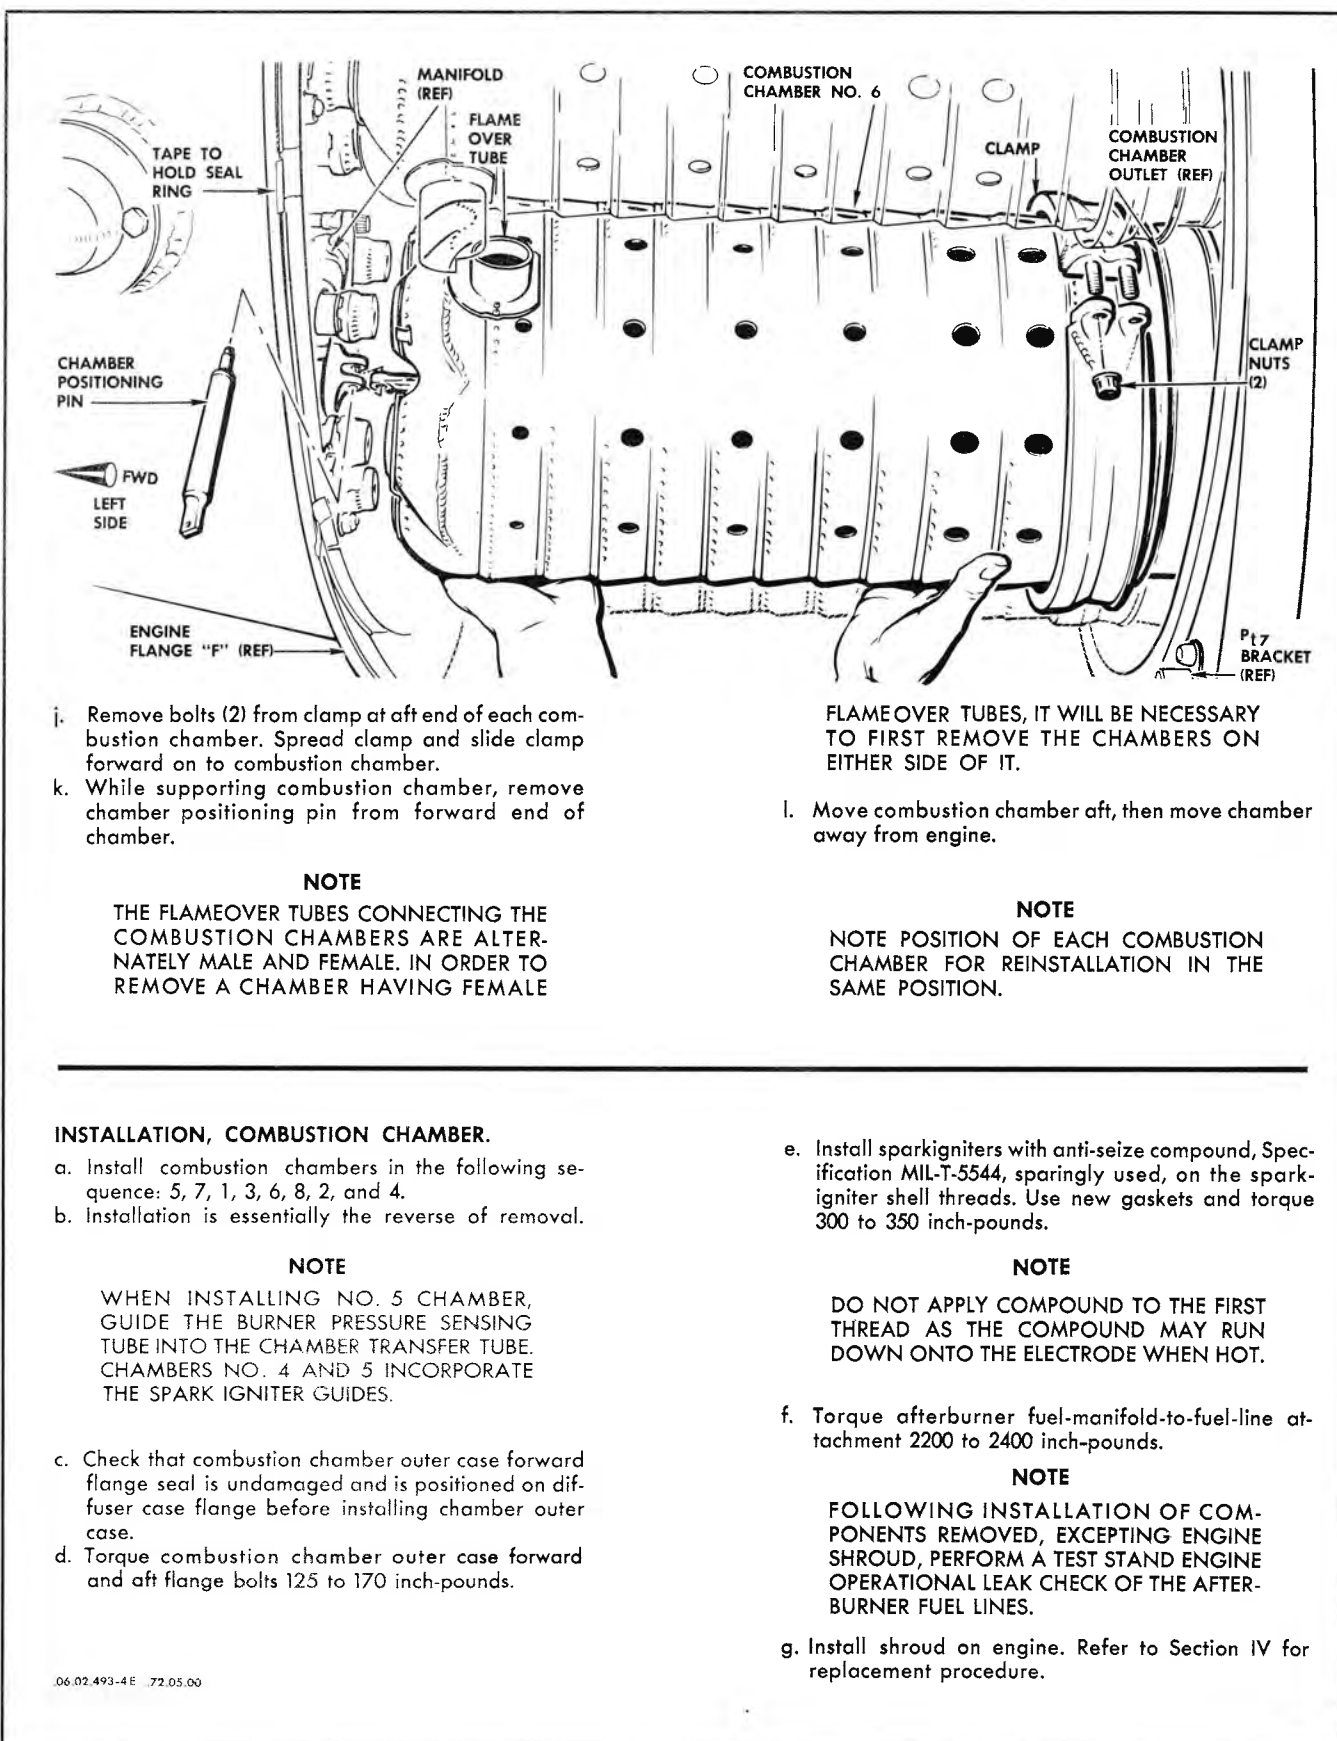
Replacement, Combustion Chambers (Sheet 3 of 3)
